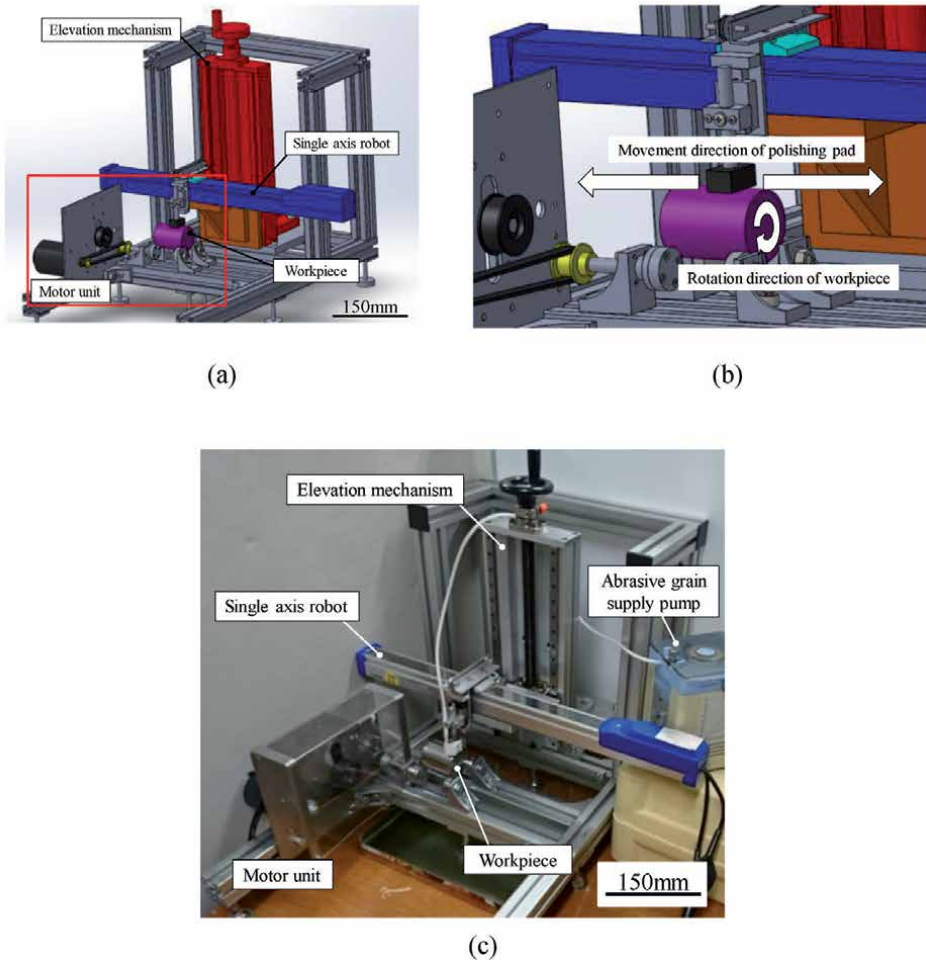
Centerless polishing machine to polish cylindrical SUS310S molding die surfaces. (a) 3D model of Centerless polishing machine. (b) Polishing method on the machine. (c) Overview of Centerless polishing machine.
